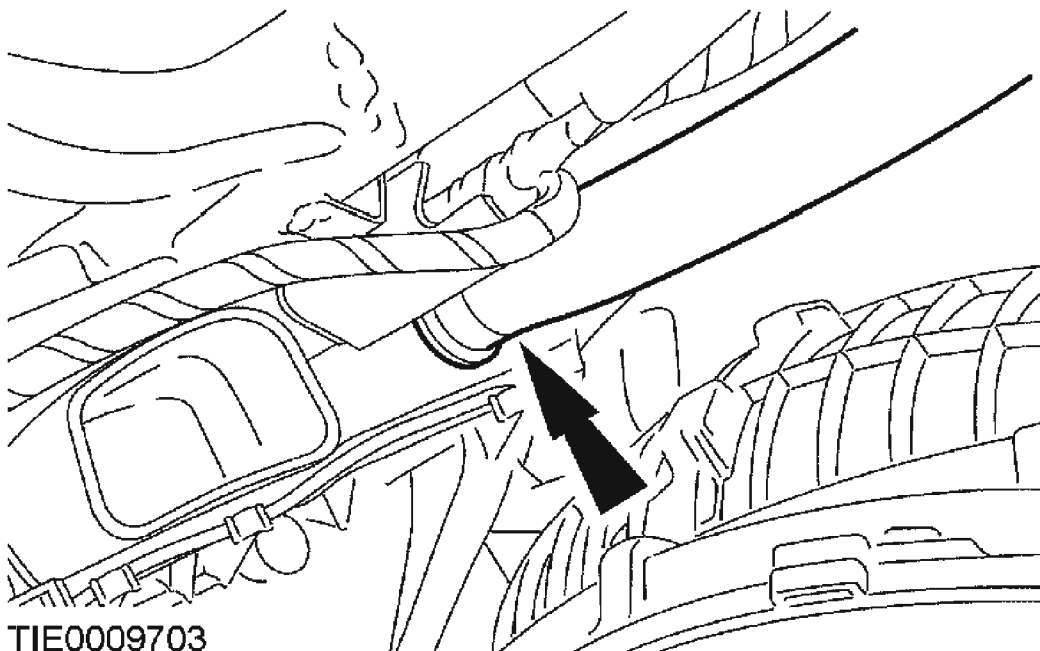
Attaching Defroster Pipe To Heater Housing And Defroster Vent
